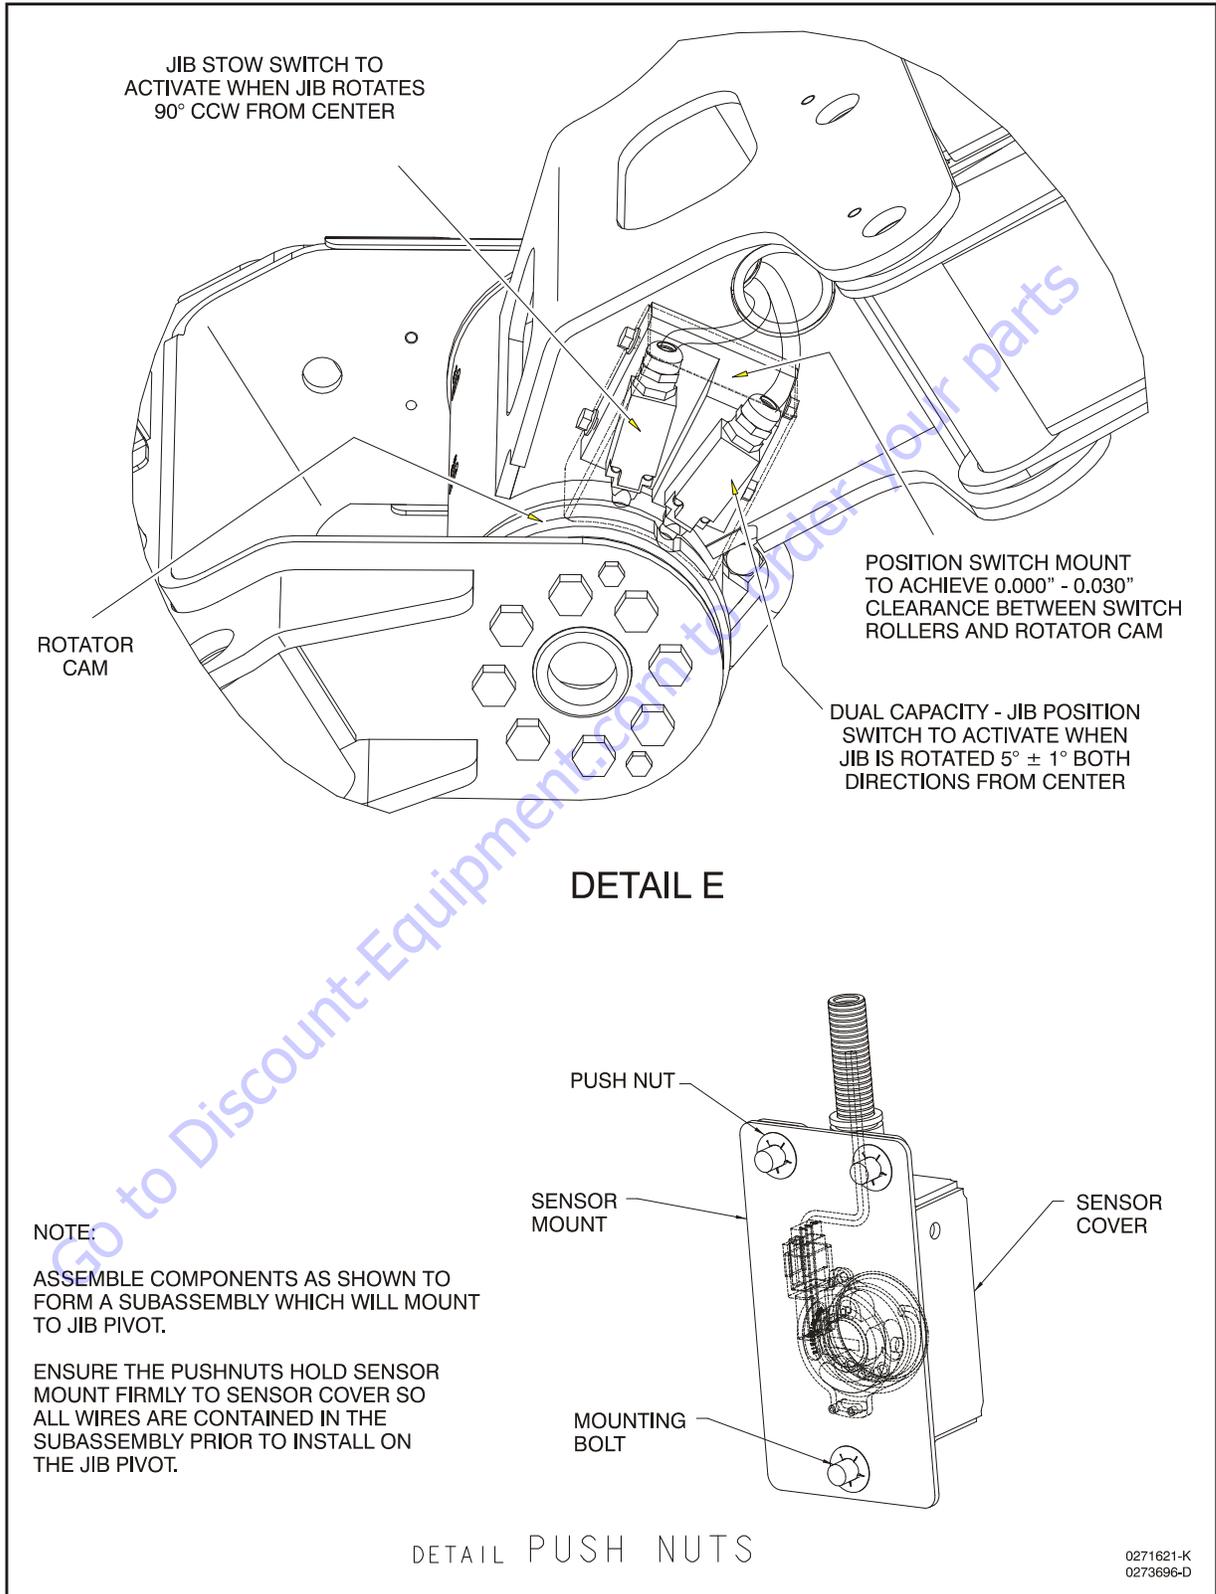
Boom/Jib Sensors and Switches Installation - Sheet 3 of 4
